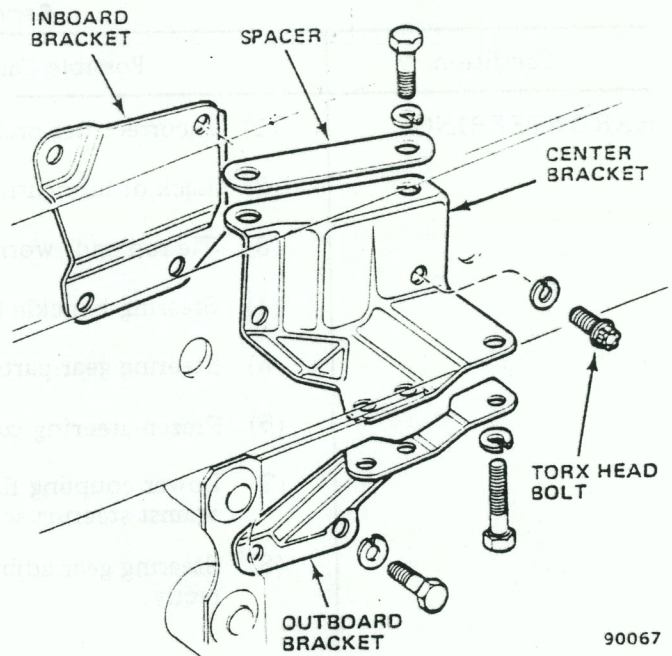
K-3 Steering Gear Mounting Brackets—CJ Models
